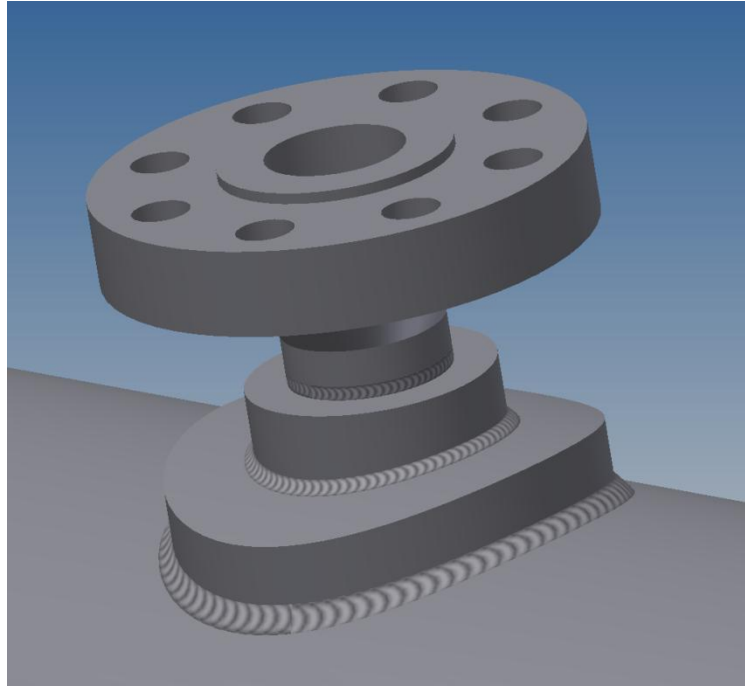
Weldment details for the heavy wall pressure vessel.
